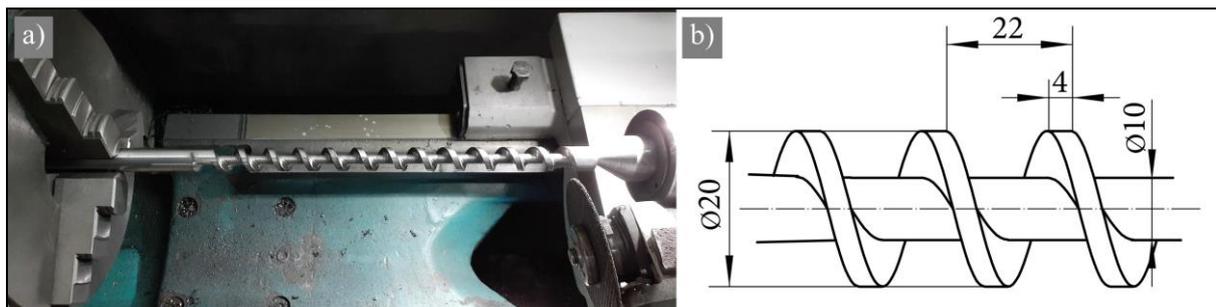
Screw details, *a)* a picture of produced screw on a regular lathe and *b)* technical drawing of the designed screw
